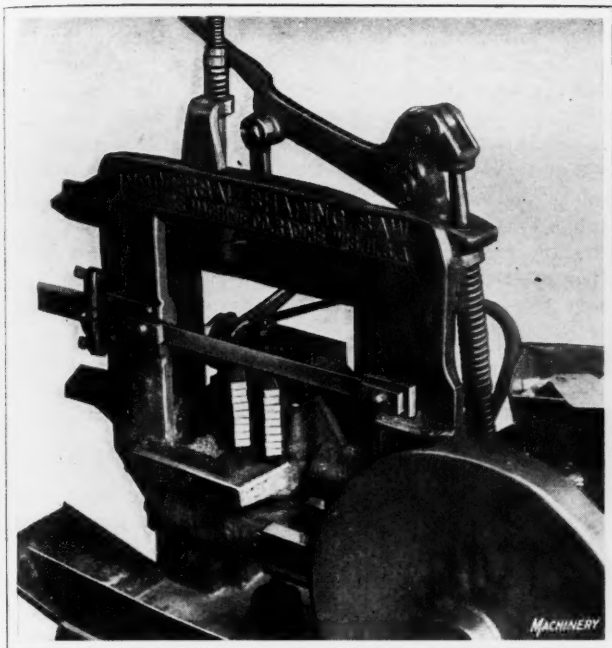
Sawing Machine arranged with Special Fixture designed to reduce Excess Stock on Blades to a Minimum
